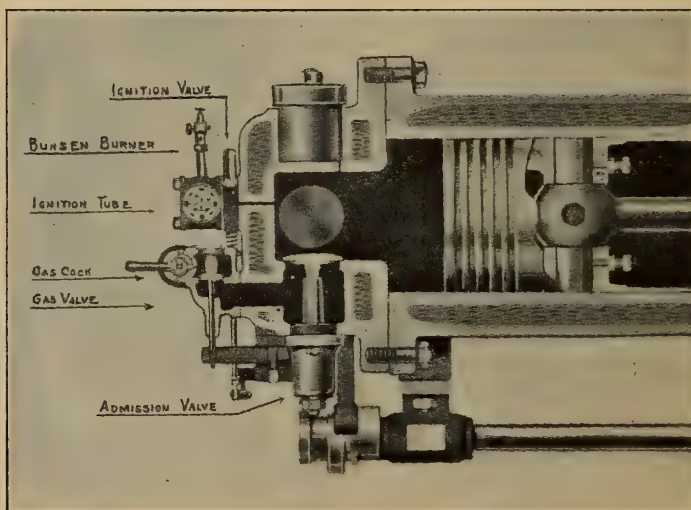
DETAILS OF CYLINDER-HEAD CONSTRUCTION OF ACME GAS ENGINE
